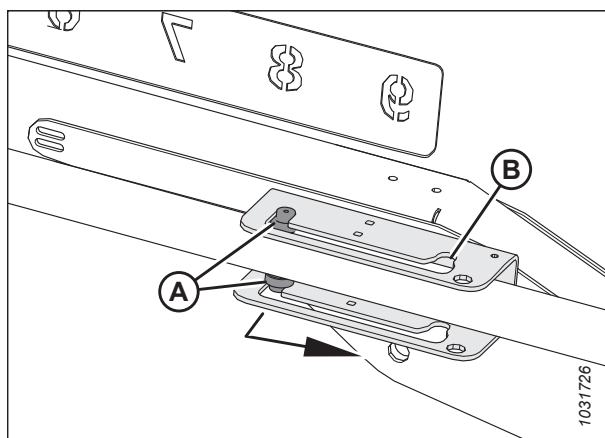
Fore-Aft Cylinder Adjustment Type 2 – Forward Position
